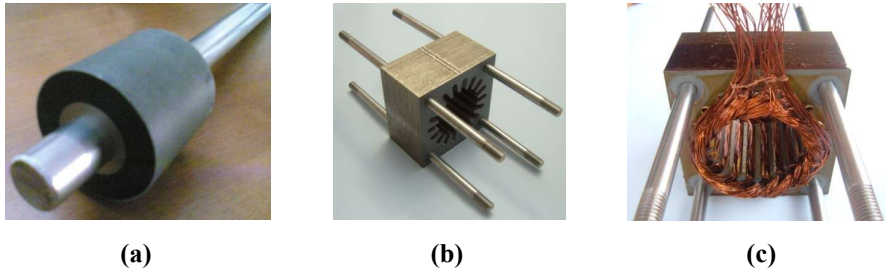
Constitutive parts of the assembled motor, namely (a) HTS rotor from ATZ GmbH Company with stainless steel shaft inserted; (b) stator built by stacked laminations of non-oriented silicon iron; and (c) stator windings inserted in slots, where each of the 18 coils spans along four slots, and is independent from the others.
